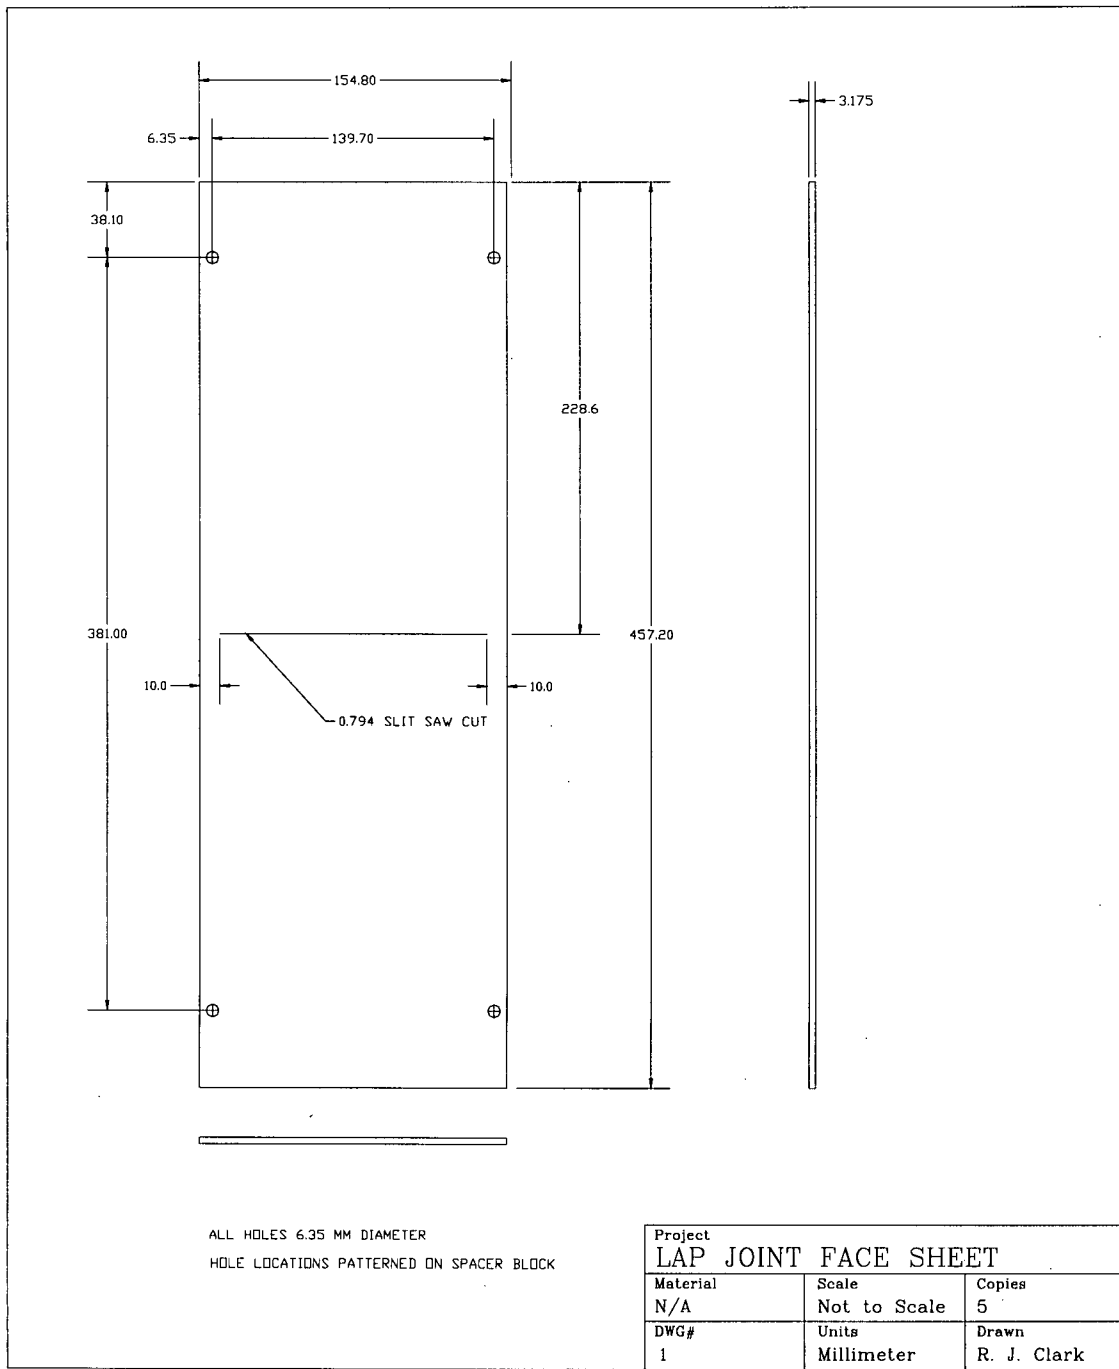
DLJ and HS-DLJ specimen face sheet drawing
